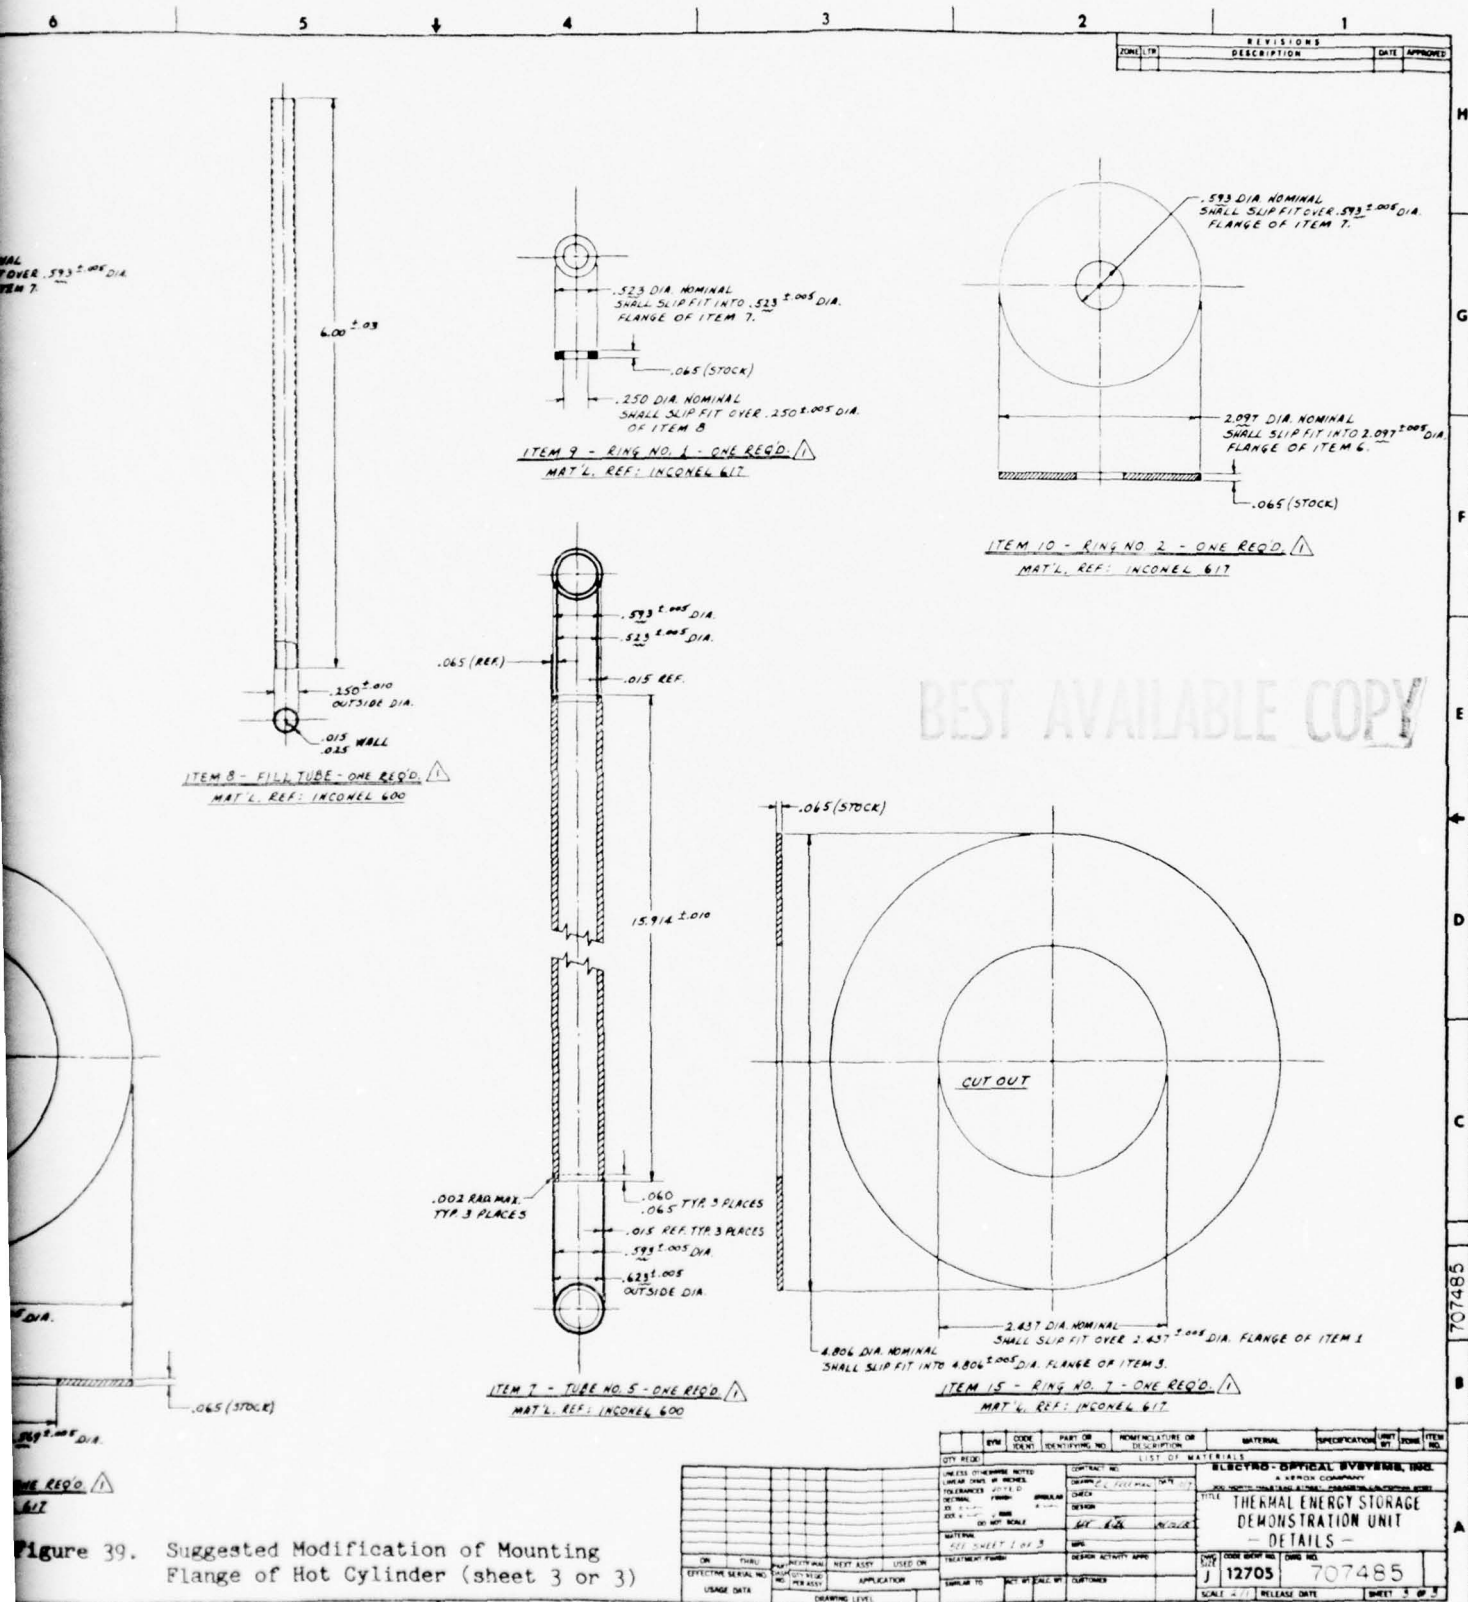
Suggested Modification of Mounting Flange of Hot Cylinder (sheet 3 or 3)
